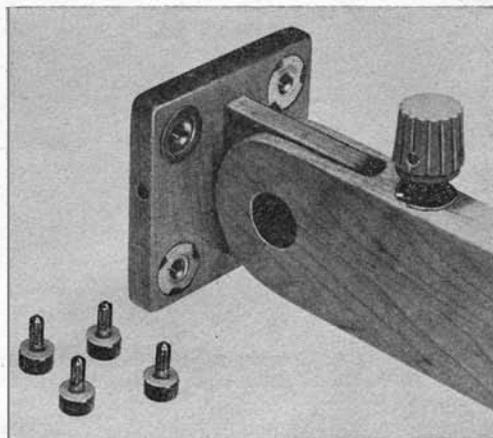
Use of knurled-head bolts or thumb screws facilitates the removal of the transmitter board for storage, and to solve certain locating problems.
